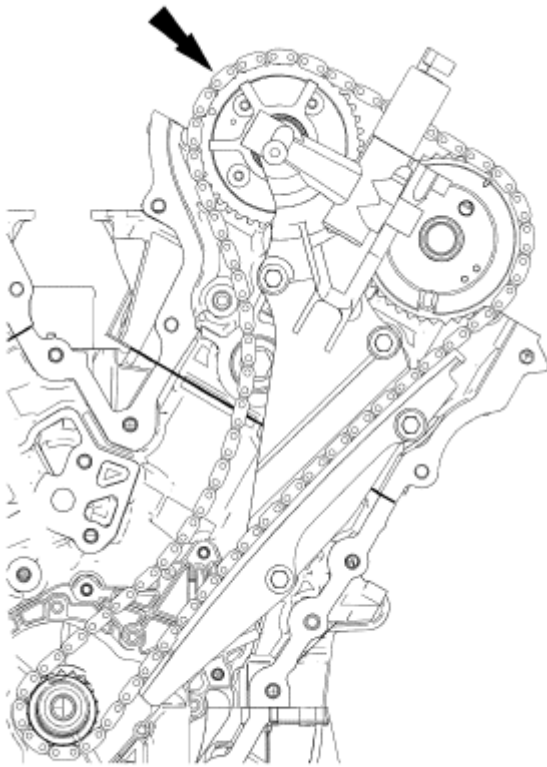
Identifying Bolts, Tensioner, LH Tensioner Arm
